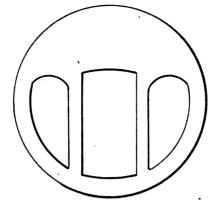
SHOWING THE BALANCE WHEEL WHICH IS PLACED ON CRANK THROW.
